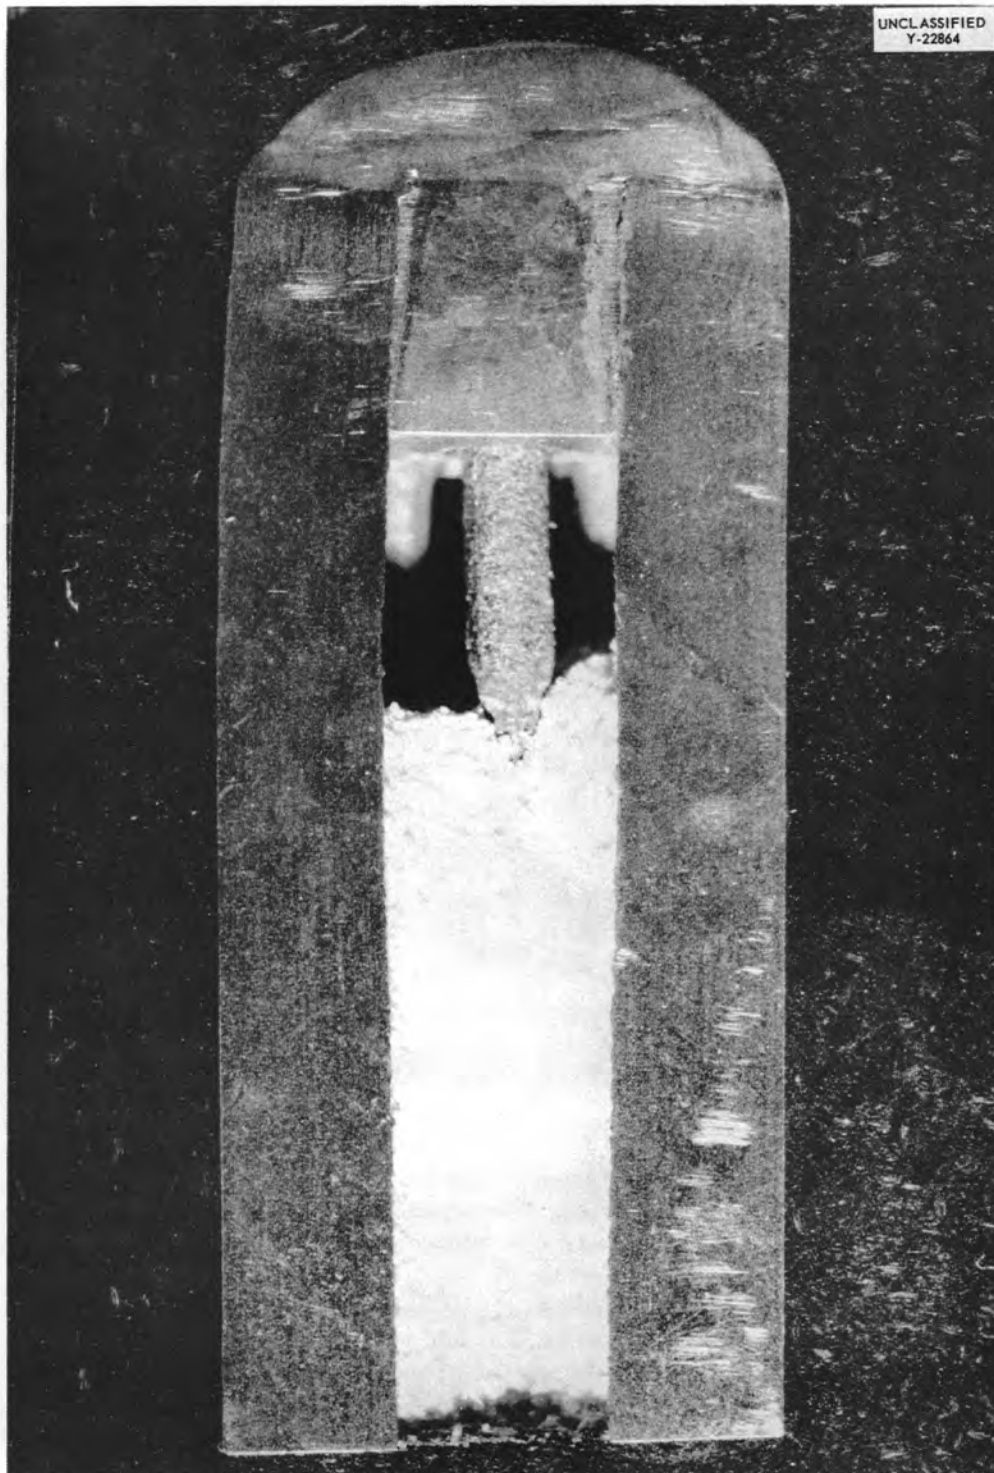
Cross Section of Heliarc-Welded Junction on Inconel-Sheathed Thermocouple. Shows Inconel filler tip, weld to 0.250-in.-dia $\times$ 0.030-in.-wall tubing, No. 20 AWG thermocouple wire, void, and white magnesium oxide insulation.
